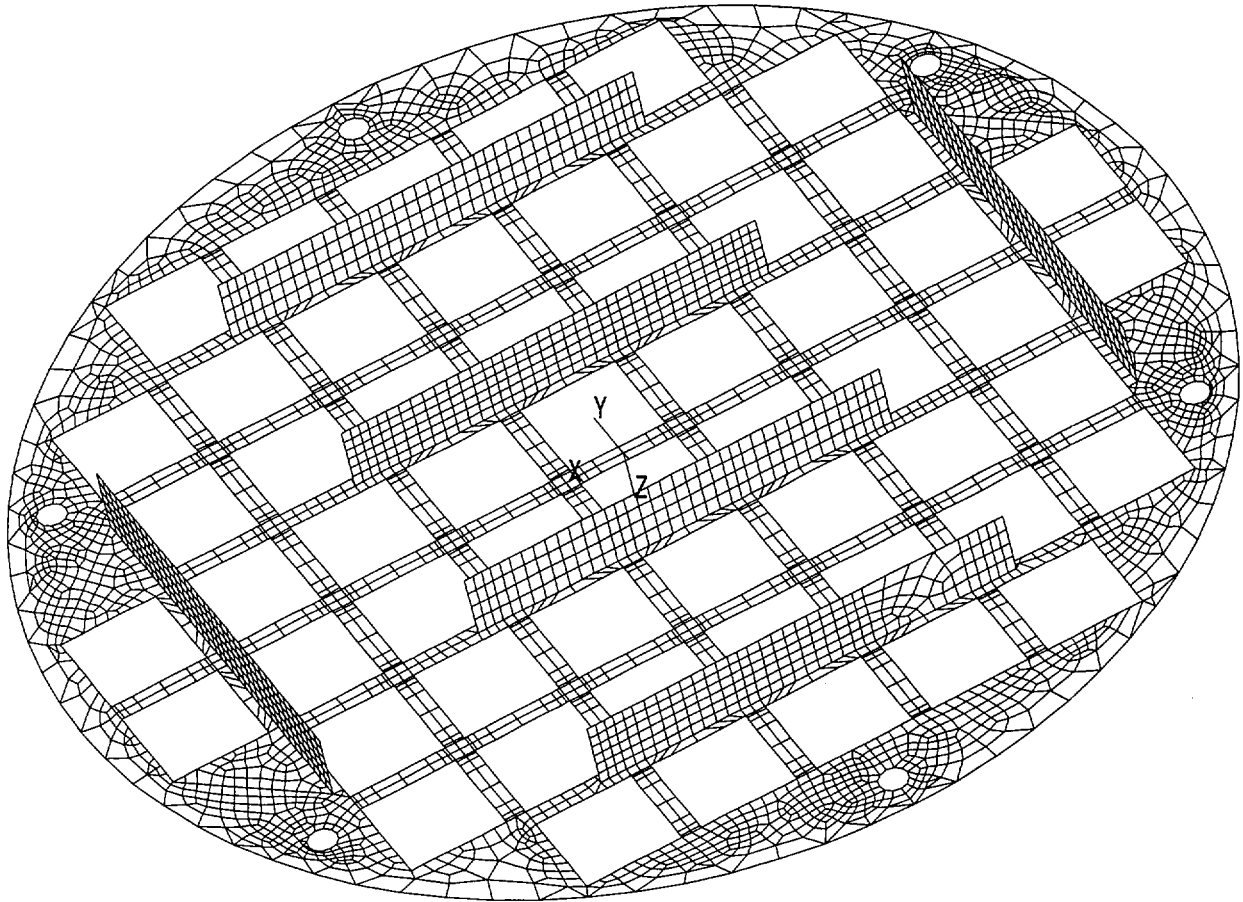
BWR Bottom Weldment Plate Finite Element Model
